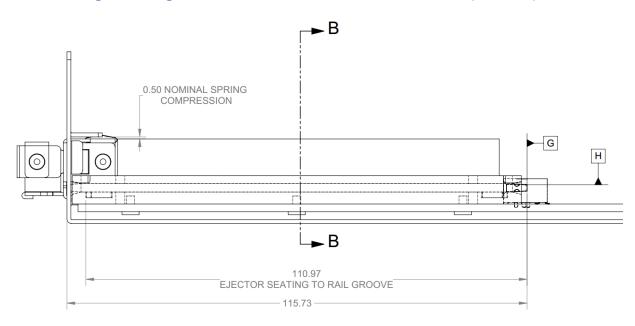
Large Form Factor Baseboard Chassis CTF Dimensions (Side View)
